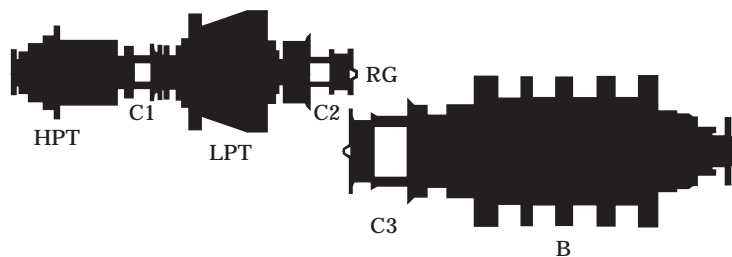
Schematic view of the turbine–blower assembly. HPT, High pressure turbine; LPT, low pressure turbine; B, Blower; C1, C2, C3, couplings; RG, reduction gear.
